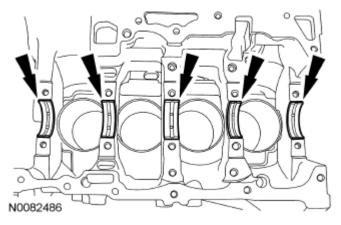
Locating Crankshaft Thrust Bearing Courtesy of FORD MOTOR CO.
